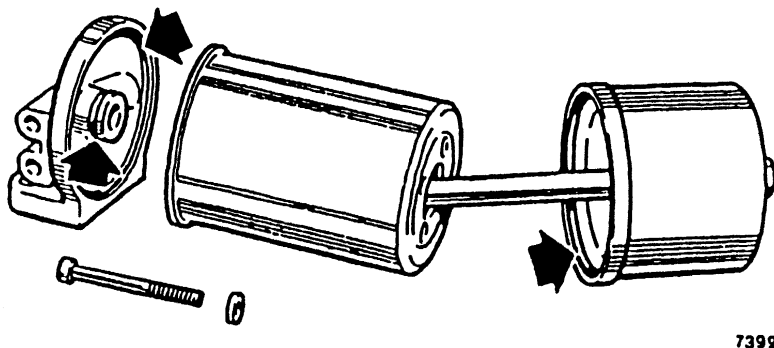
Renewing fuel filter element. Arrows indicate sealing rings and gaskets
